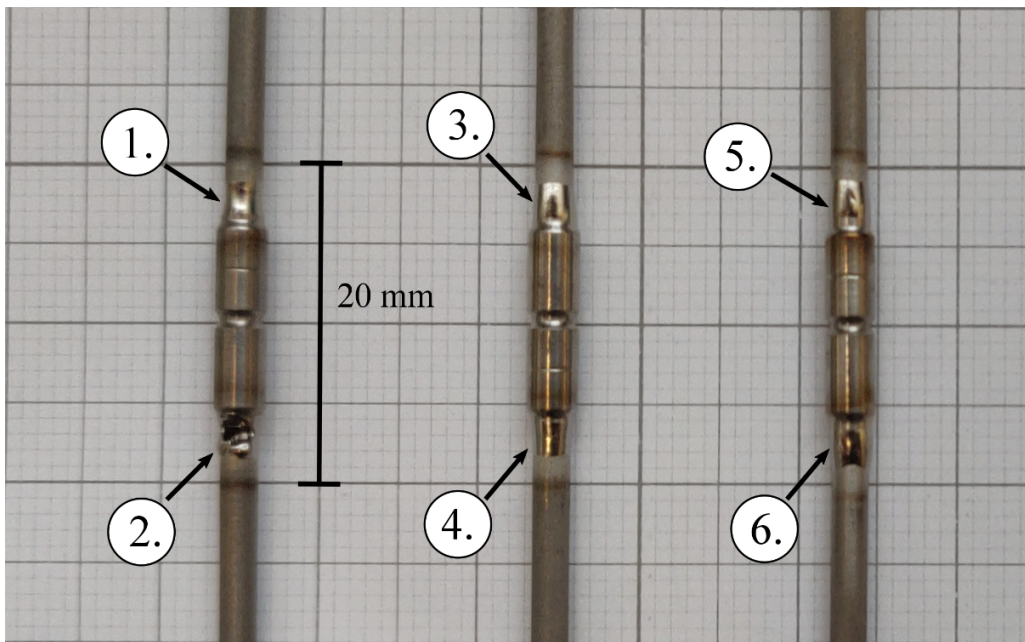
Photograph of a selection of welds with ‘low limit’ inner diameter pressurization (1,2), correct inner diameter pressurization (3,4) and ‘high limit’ inner diameter pressurization (5,6).
